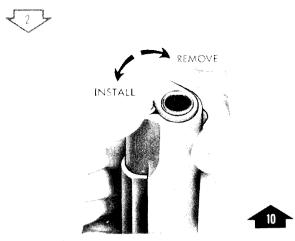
Operator's disassembly/assembly of Calilber .45 Automatic pistol, M1911A1. (1 of 3)
